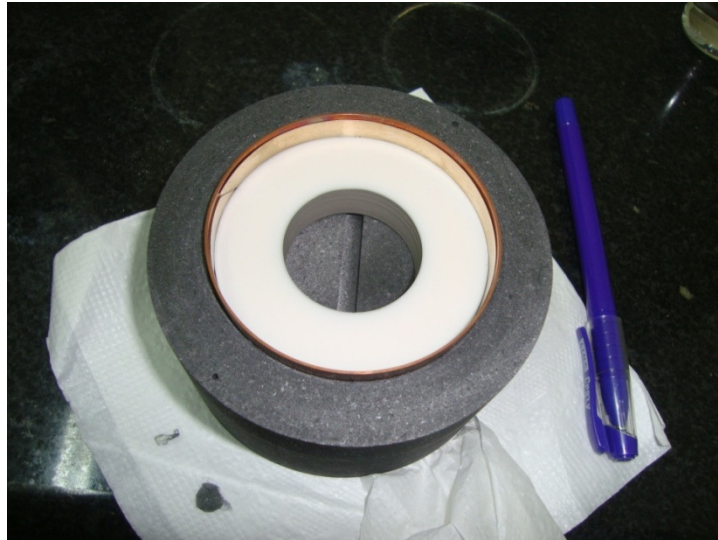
Test model assembly (alumina ceramic to metal (Cu) brazing with cusil filler and constrained with Graphite tooling fixture
